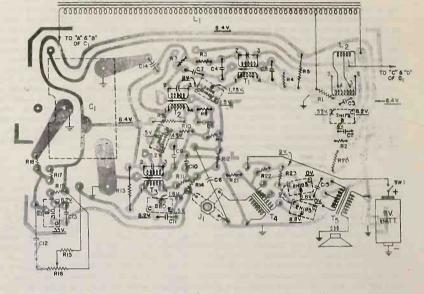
Bottom View of Printed Board Showing Top Components Symbolically
